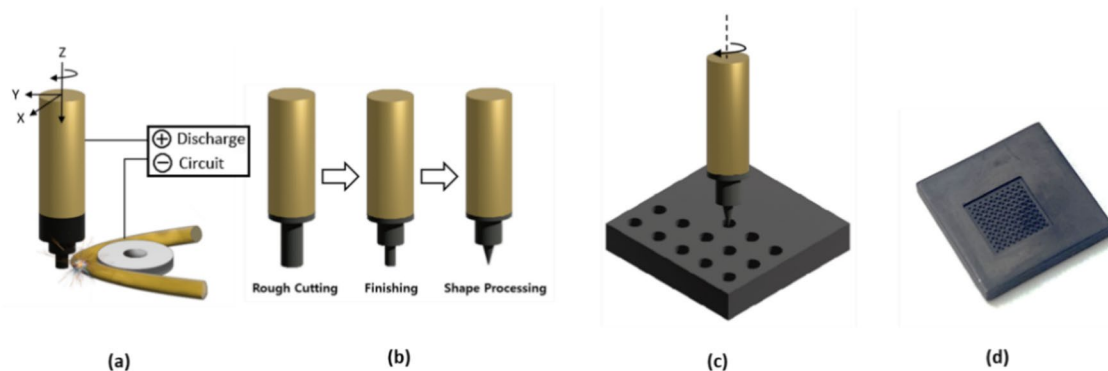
Schematic and optical image of the carbon mold manufacturing process using the machining process. Schematic of (a and b) the PCD tool manufacturing process using micro-WEDM and (c) the carbon mold fabrication process using the customized microtools. (d) Optical image of the fabricated carbon mold.
